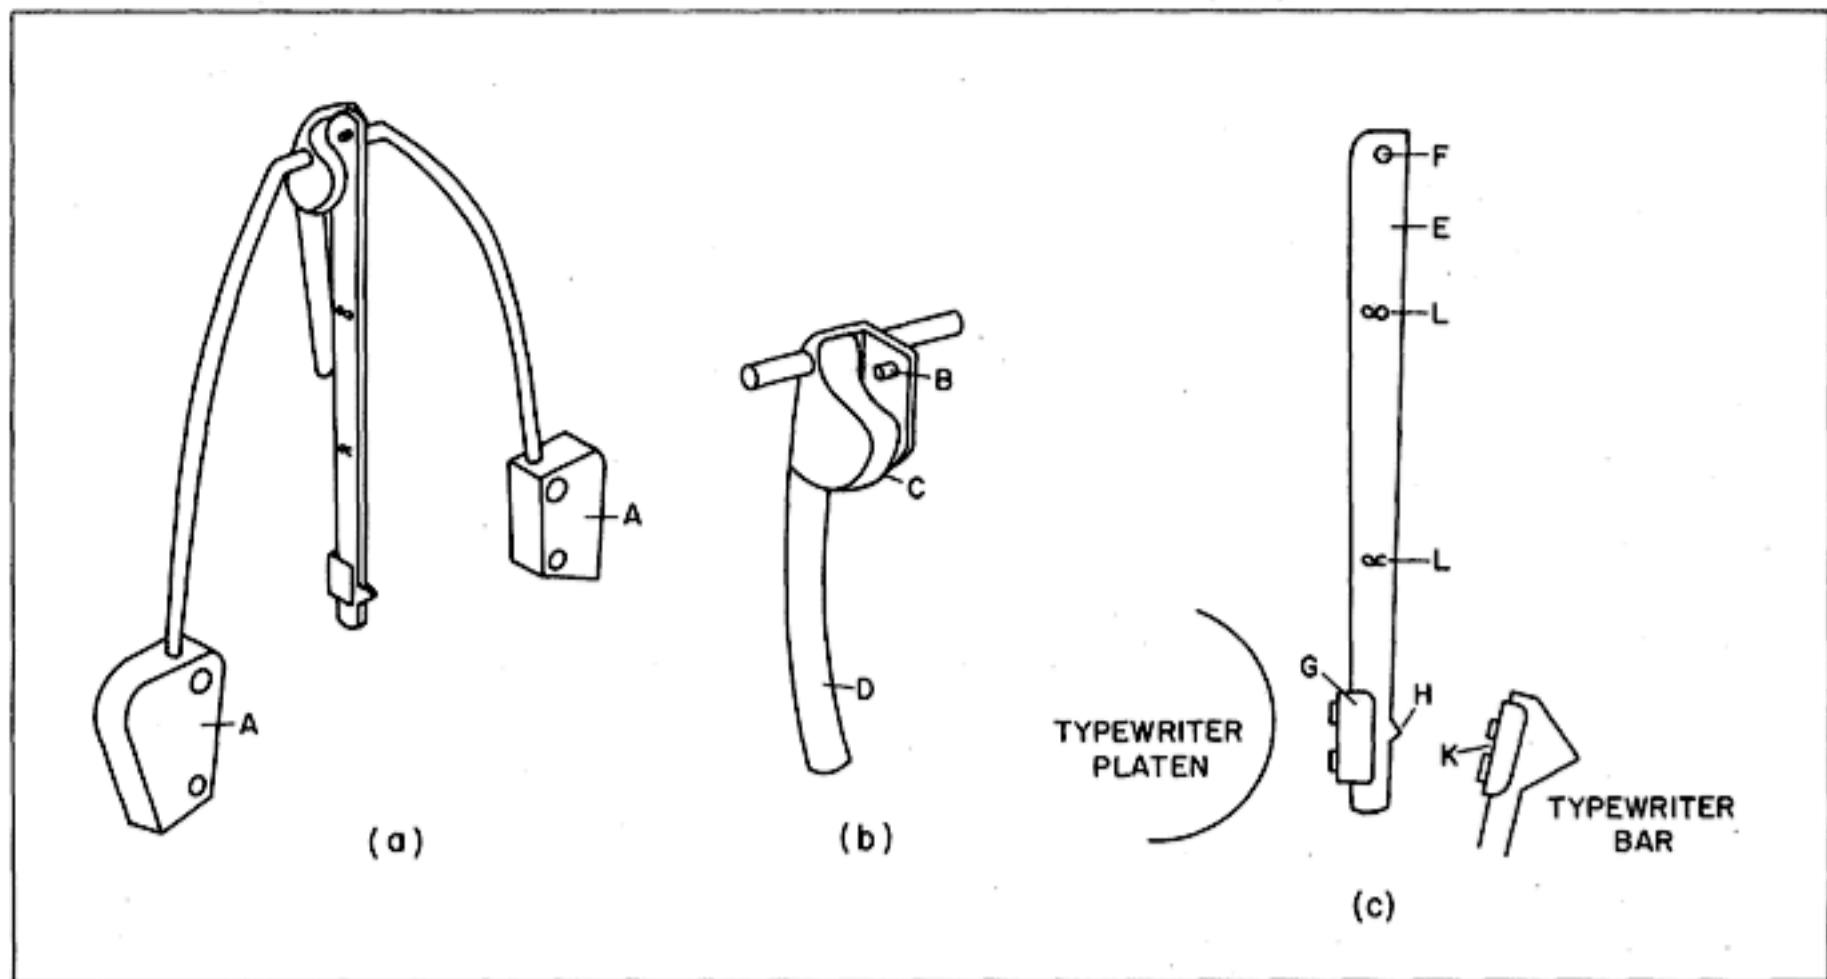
Diagram of typewriter attachment showing (a) complete assembly with type arm in position, (b) detail of bracket, and (c) detail of arm. A - plates for attaching the assembly to the typewriter without altering the latter; B - pin on which the type arm hangs; C - slot into which the arm slips, providing horizontal alignment; D - spring to hold arm slightly out of the way of the typewriter ribbon; E - thin metal strip; F - hole to engage pin A; G - typewriter bar with special symbols, soldered on to E; H - projection on metal strip such that it is struck by a regular typewriter bar at K, in between the upper and lower case symbols, so as not to damage the regular typewriter characters; L - upper and lower case
